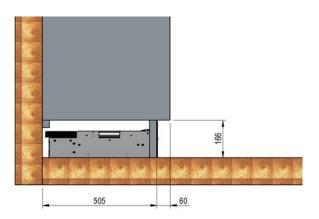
Dimensions - view from the side with CCF mounted in base of 600 cabinet.
